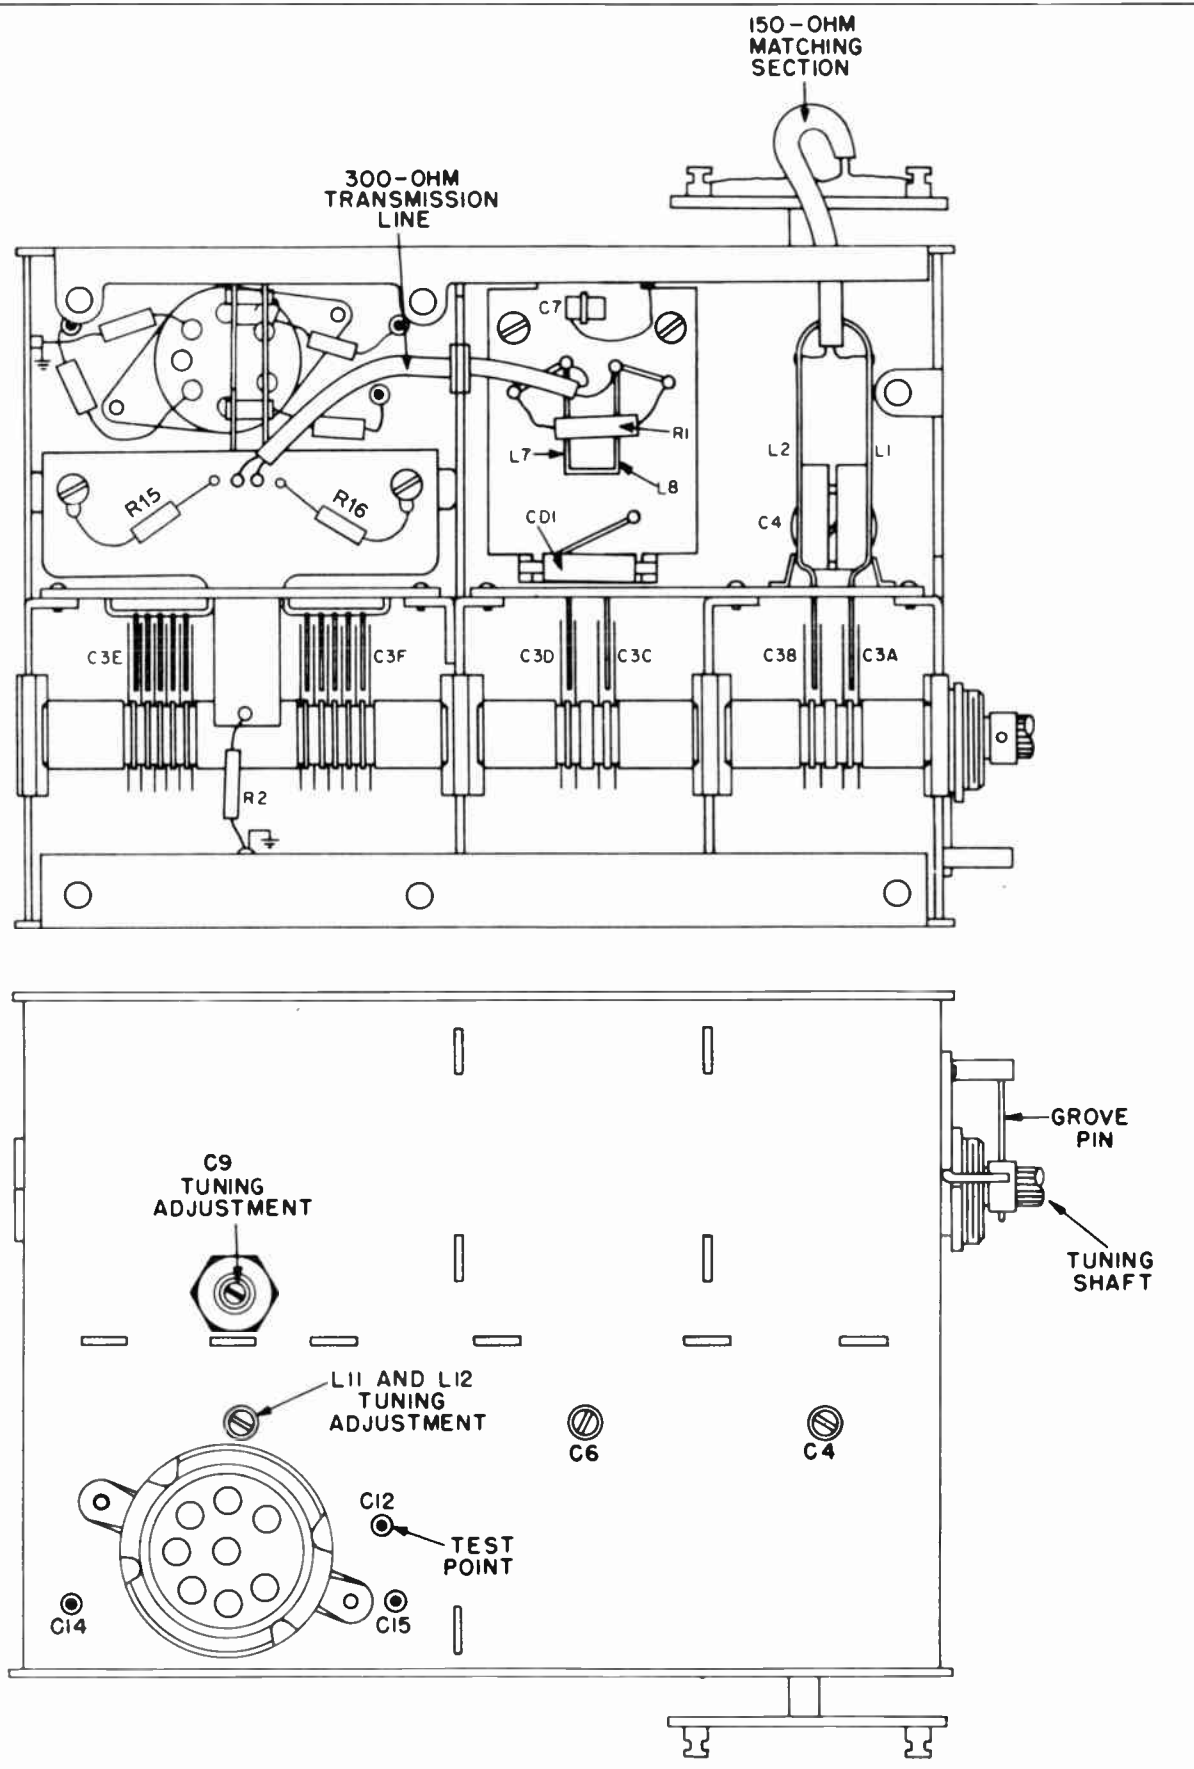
Top View and Base View of Tuner-Adapter Part No. 43-6474, With Board Assemblies
